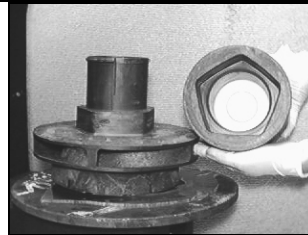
Line up pentagon of inner magnet assembly with pentagon of impeller
